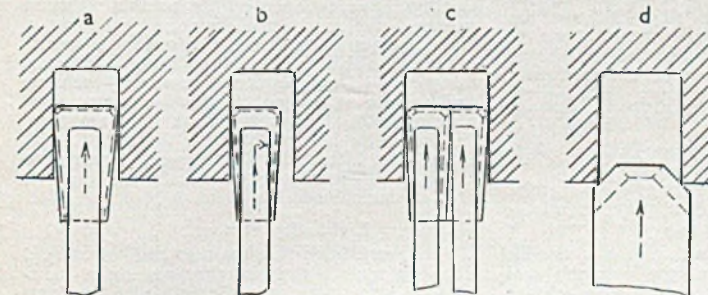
Diamond grooving tools (see Fig. 7 above): a, tool of same width as ring groove, not recommended form; b, tool narrower than ring groove; c, tool with two diamonds; d, tool for chamfering the groove edge.
